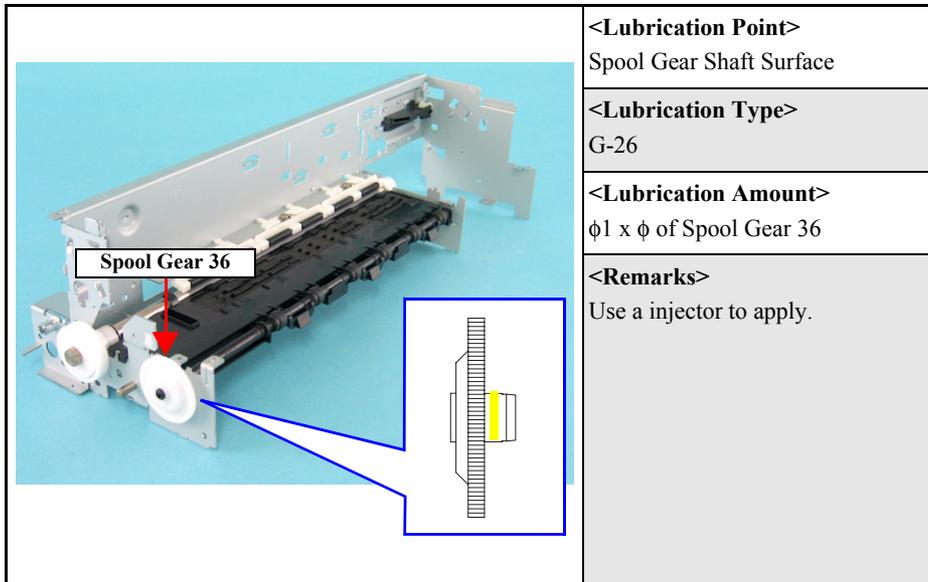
Lubrication on Paper Guide Front Unit(1)
